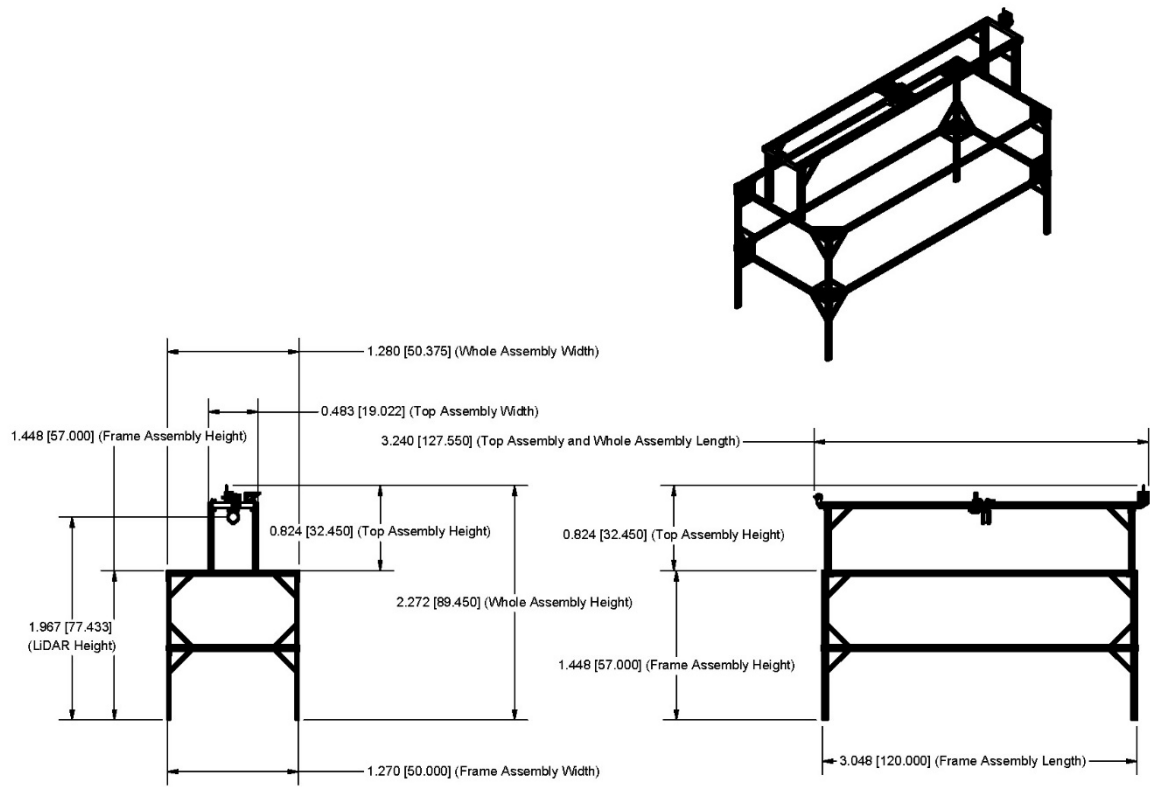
Linear motion system with the dimensions of the top and frame assembly satisfying the design constraints.
